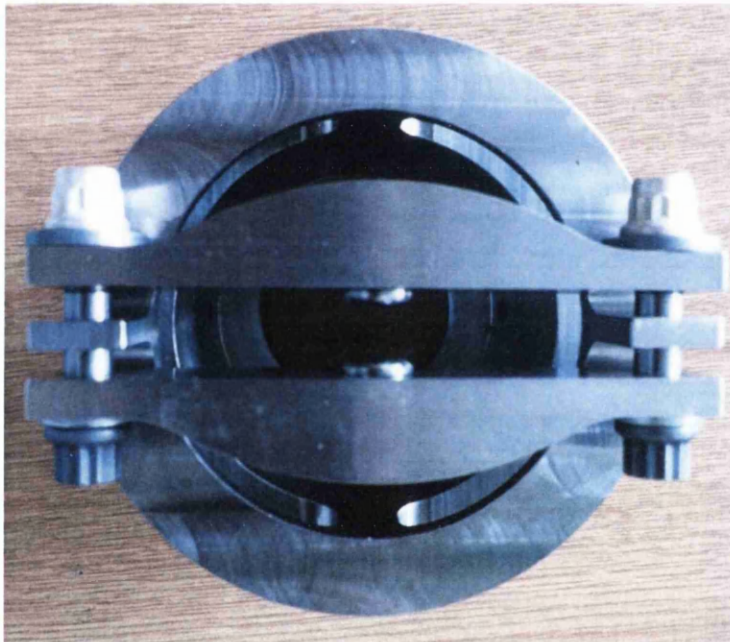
Bottom view of the clamping plates showing the fretting pads and plates
